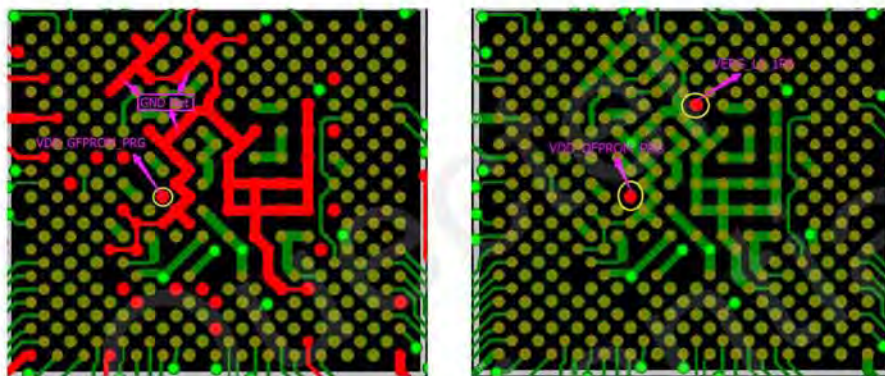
PCB Designs of BG96 R1.1 and R1.2
